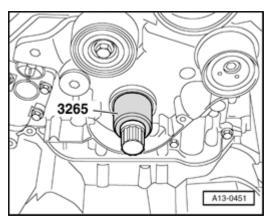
Removing Bolts & Front Sealing Flange Courtesy of VOLKSWAGEN UNITED STATES, INC.
